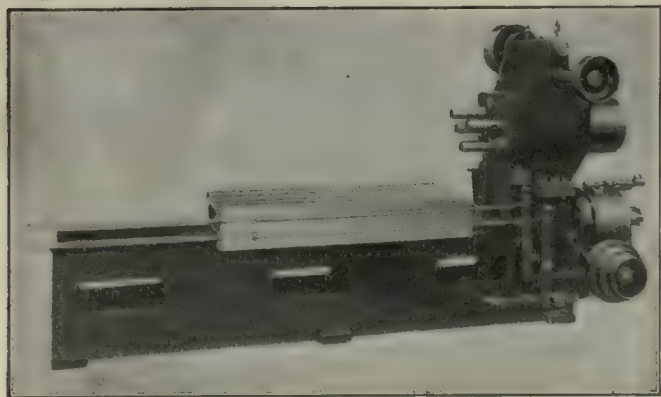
MOLINE NO. 5 HORIZONTAL BORING MACHINE
